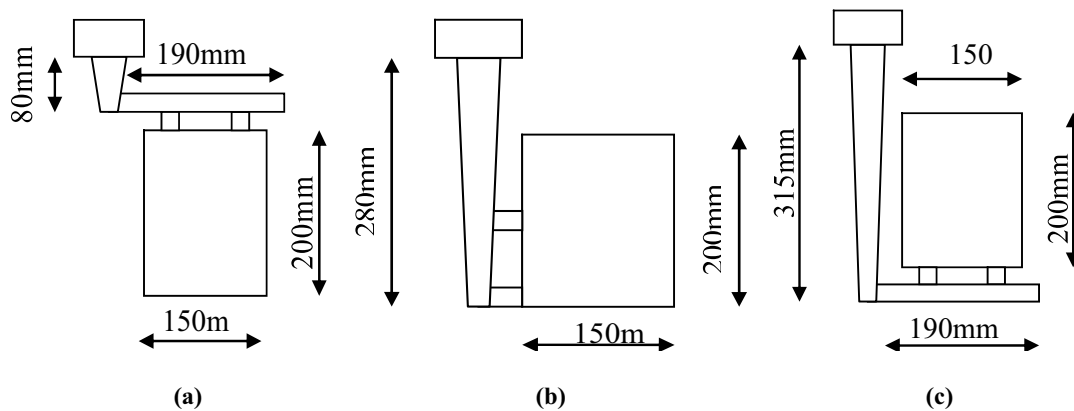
Schematic illustration of the gating system: (a) top gating (b) side gating (c) bottom gating.
